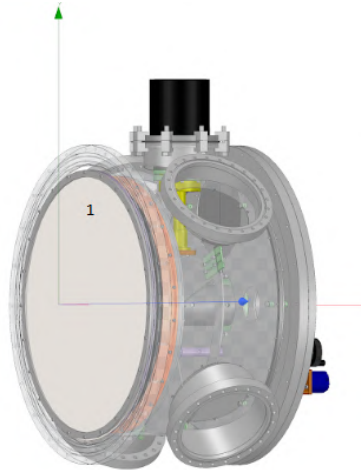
CAD image showing the calibrator cryostat with the IR filter mounted (1).
